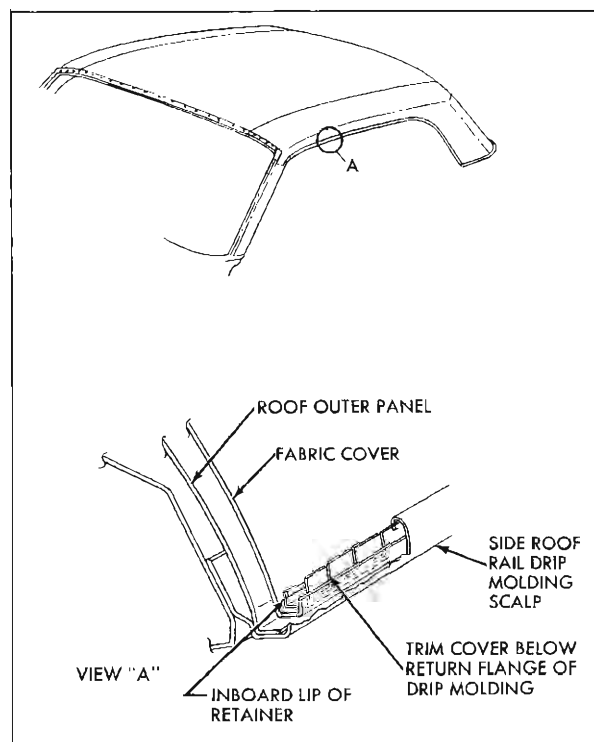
Tempest Fabric Roof Cover at Side Rail
